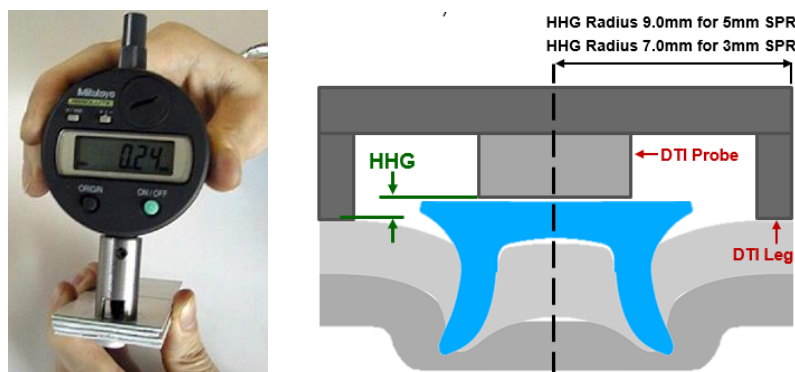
, (left) Rivet Head Height Gauge with 18mm nose and flat tip, (right) User guide diagram. (AC SPR spec 2019)
